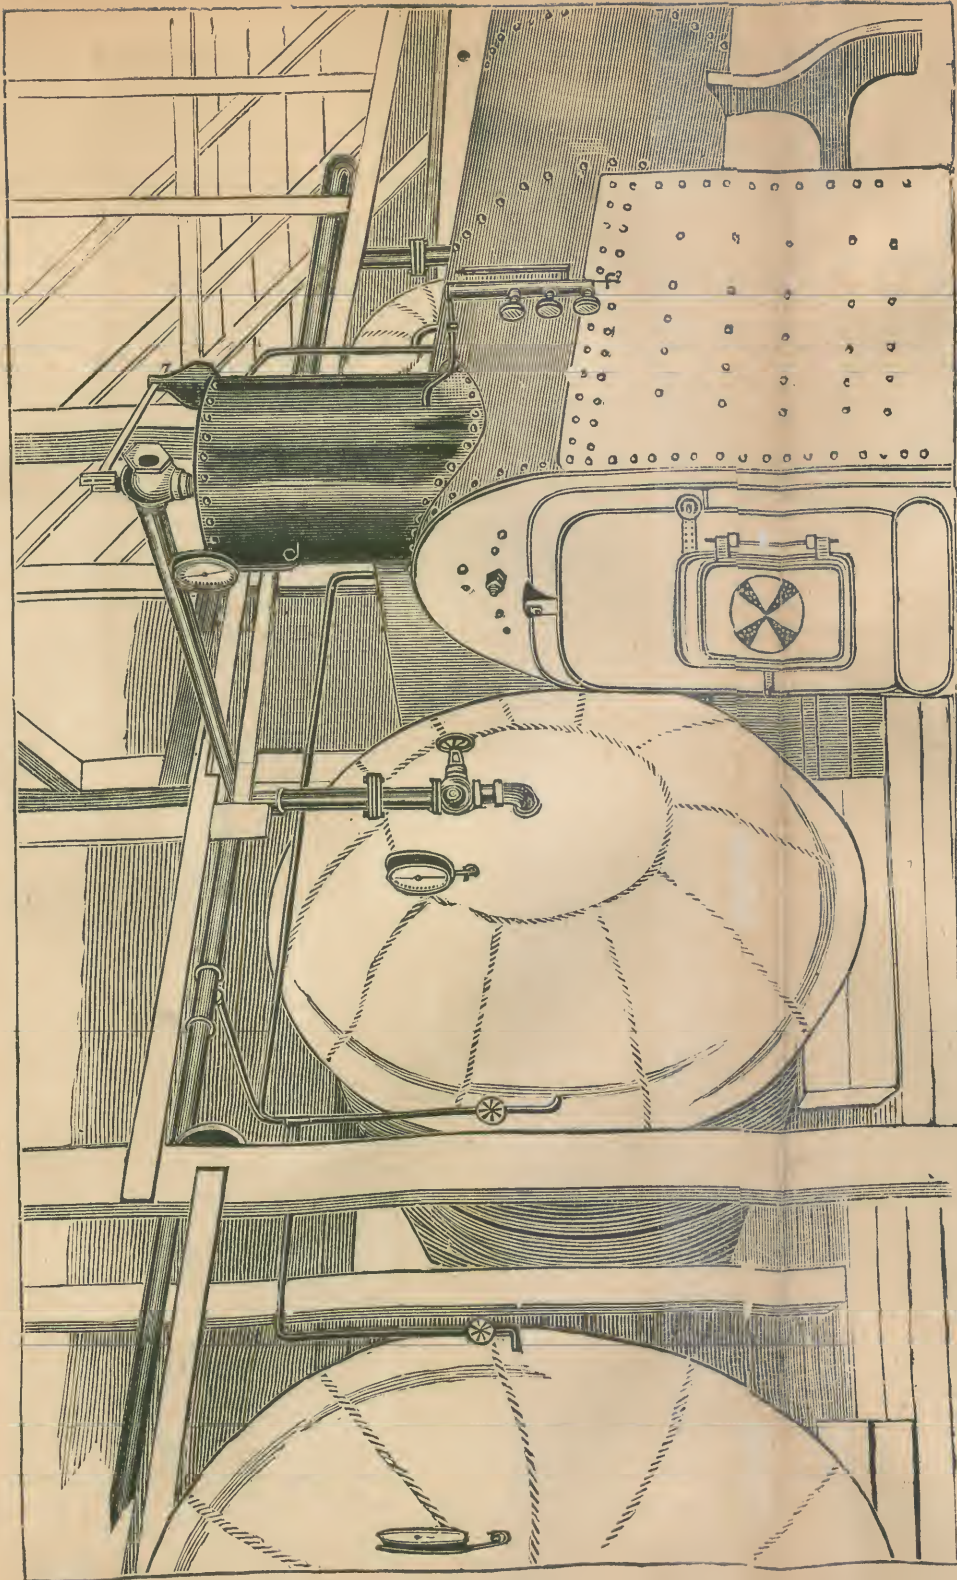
REAR END OF HEATING CHAMBERS, SHOWING STEAM CONNECTIONS.
